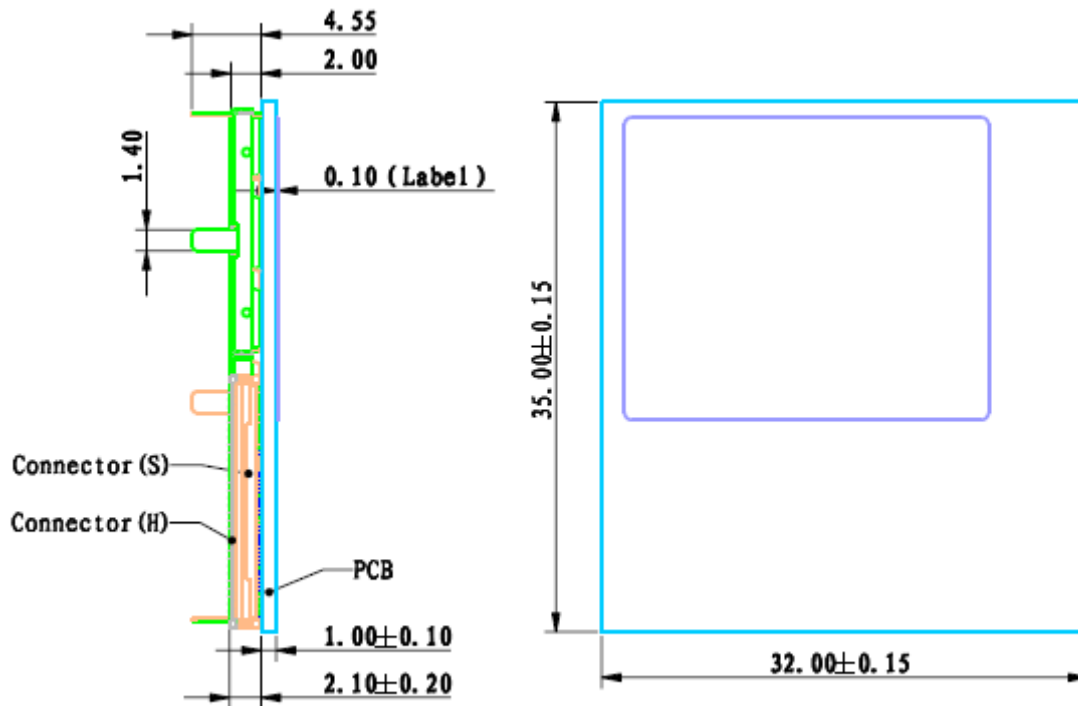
Mechanical dimensions of Bottom and side view in mm
